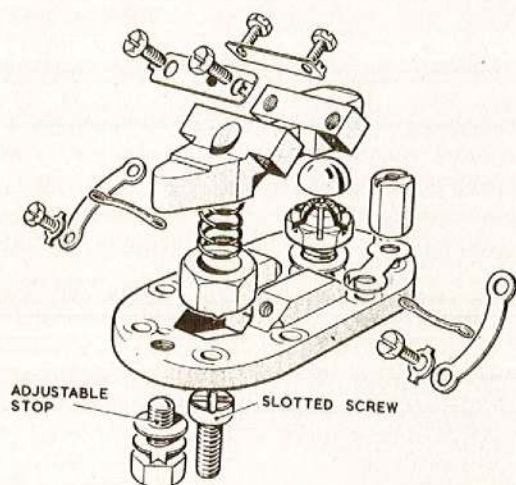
Dismantled view of amplifier valve assembly showing adjustable stop and slotted screw
